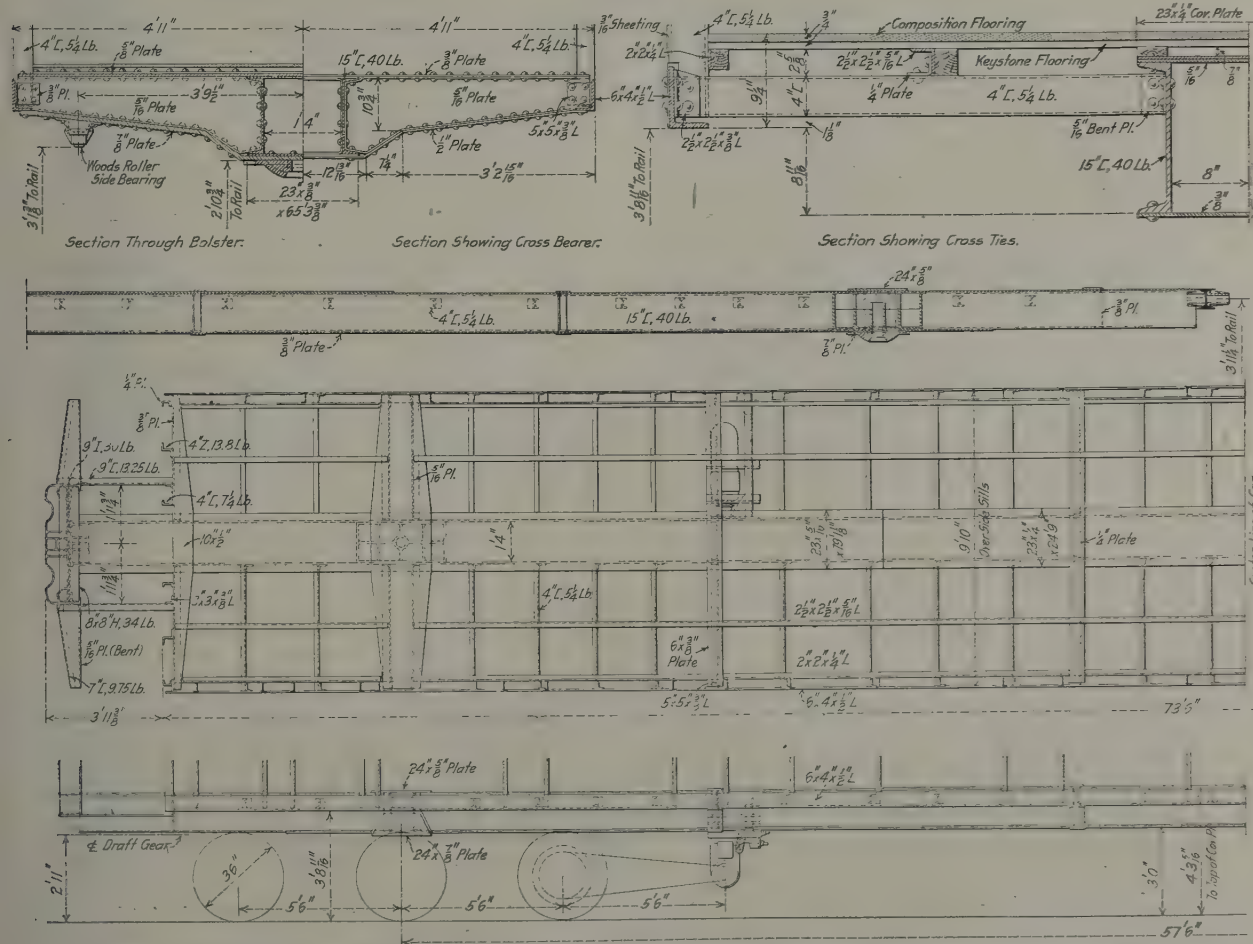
Underframe Arrangement and Details of Construction. Canadian Government Railways Sleeping Car Shown in Figs. 336-343.
